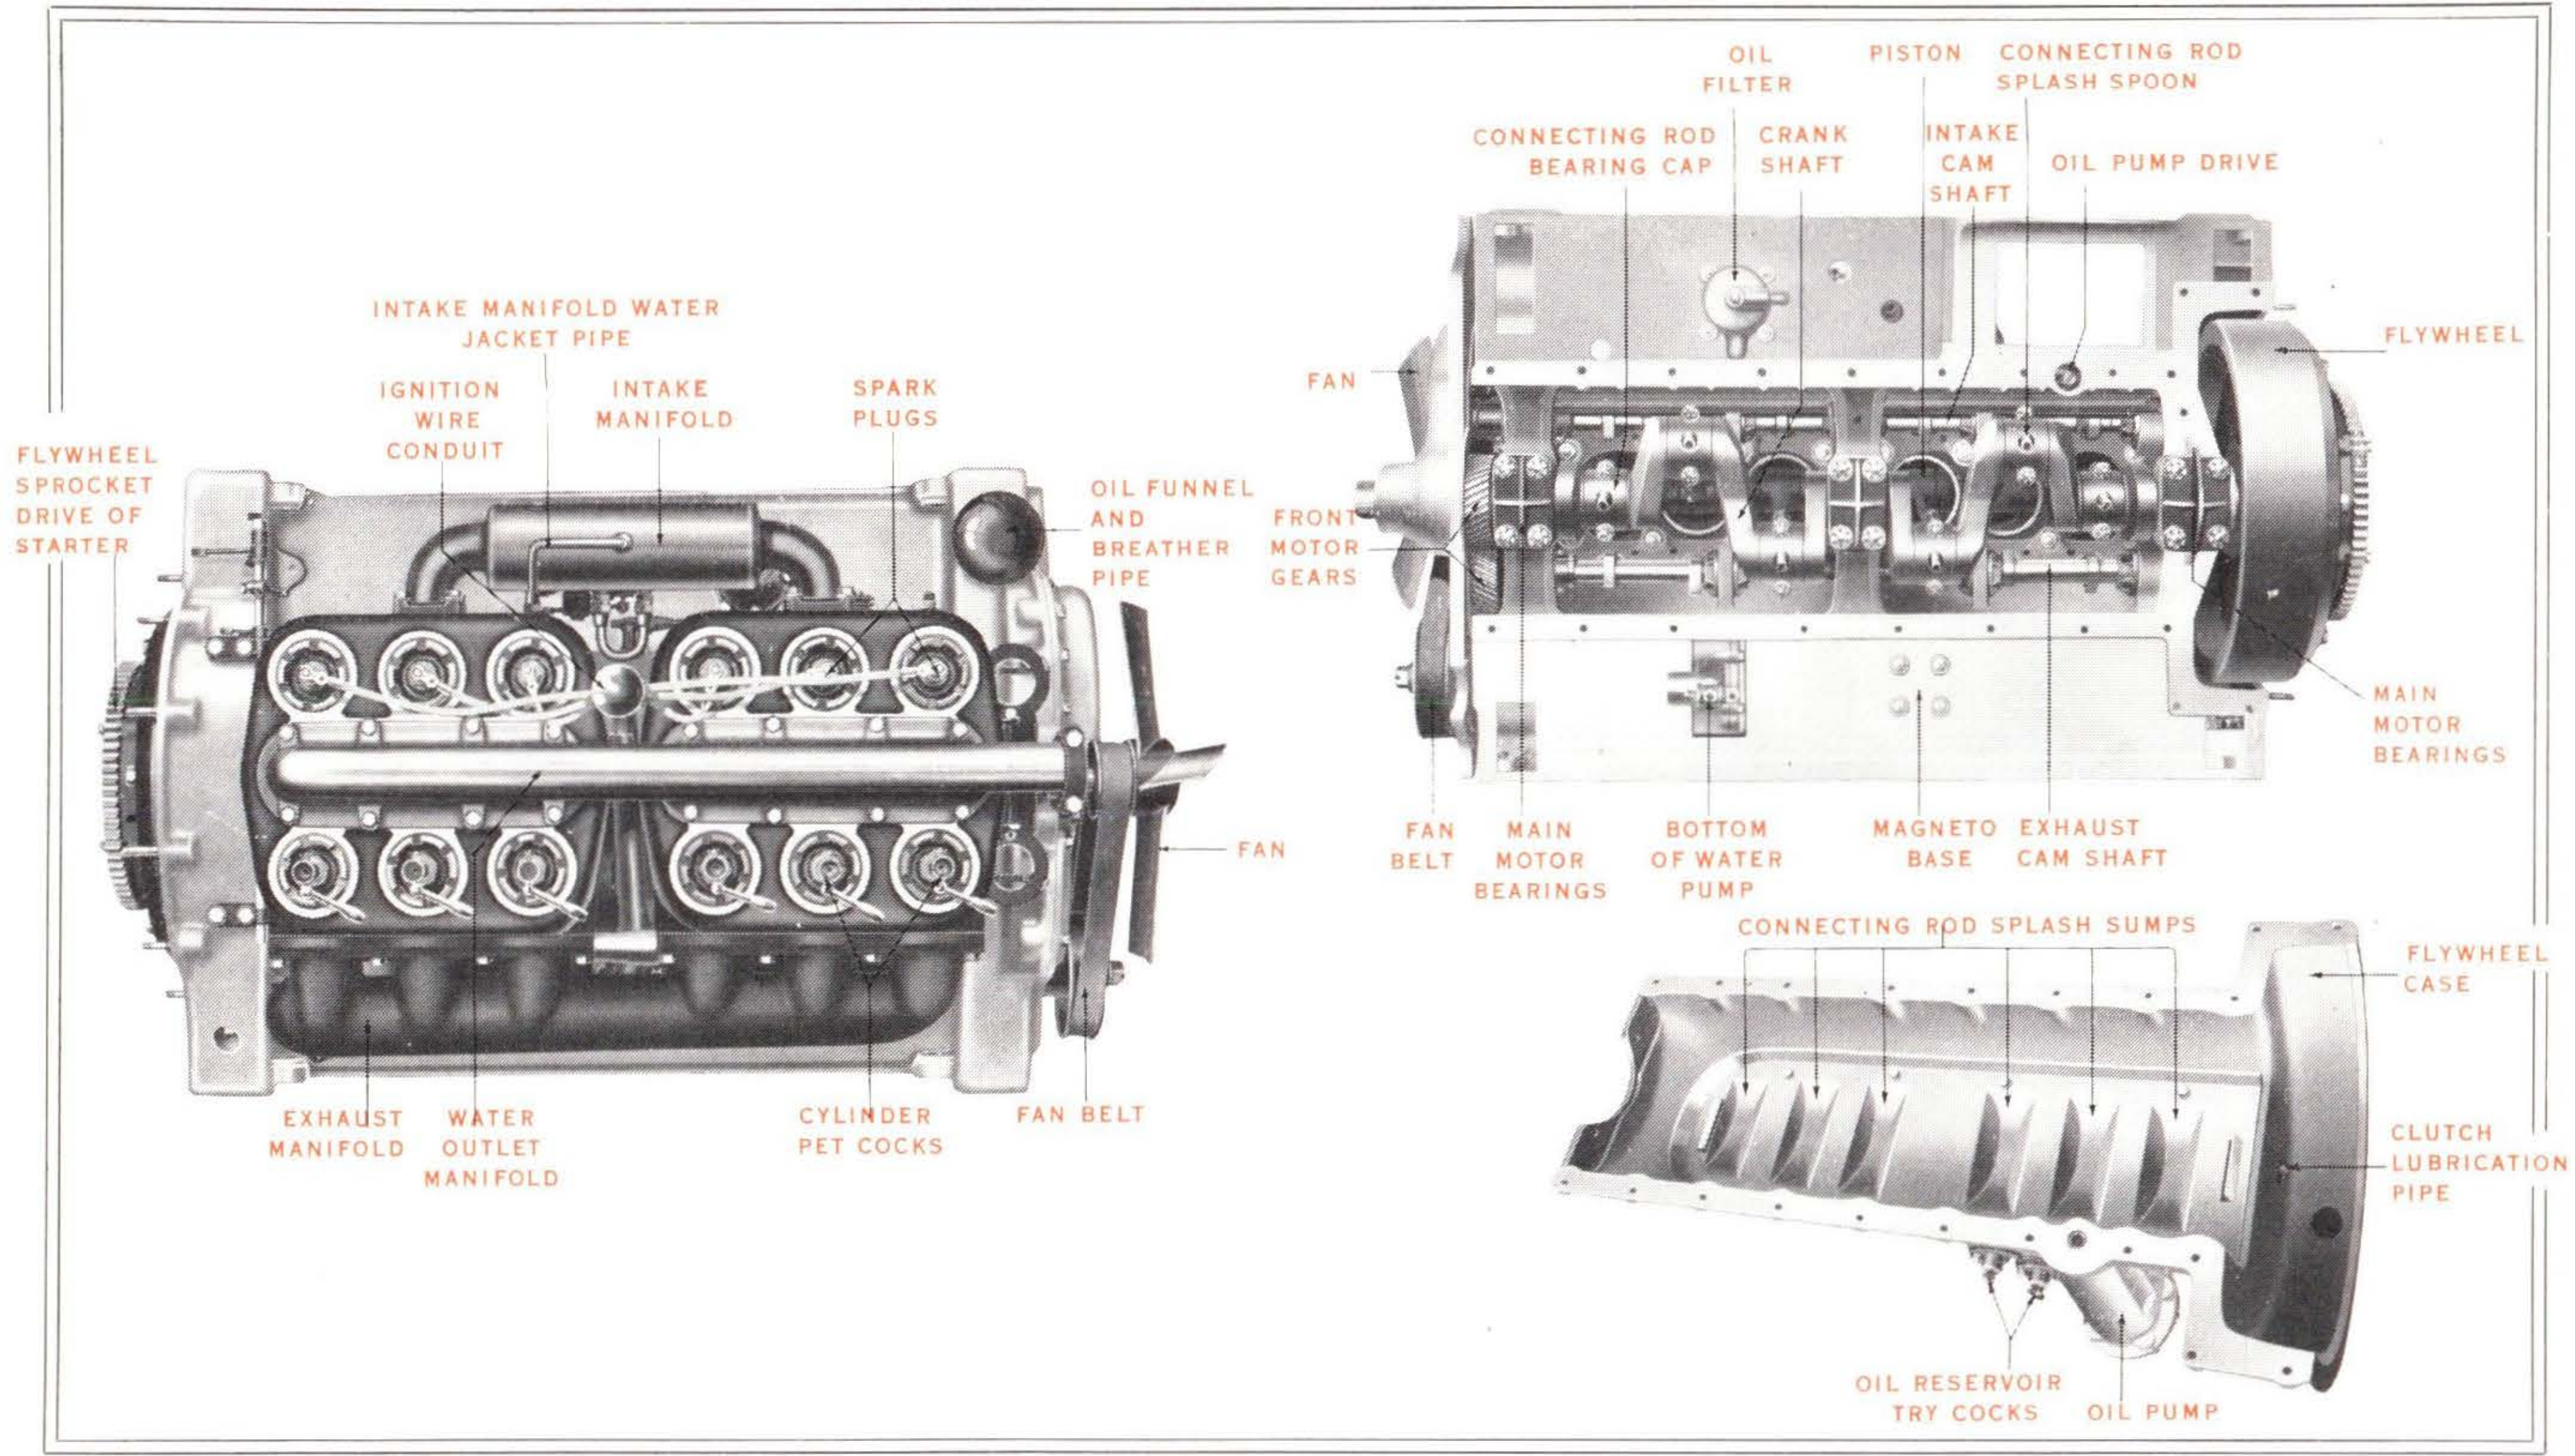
Top and Bottom Views of Motor, Chalmers "Master Six" (Model 29)
